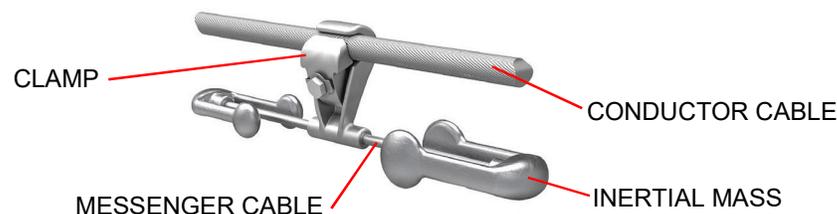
Stockbridge damper coupled to a conductive cable (Pfisterer, 2020).
